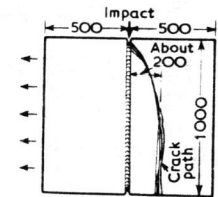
Crack path in welded specimen for mild steel [12].
